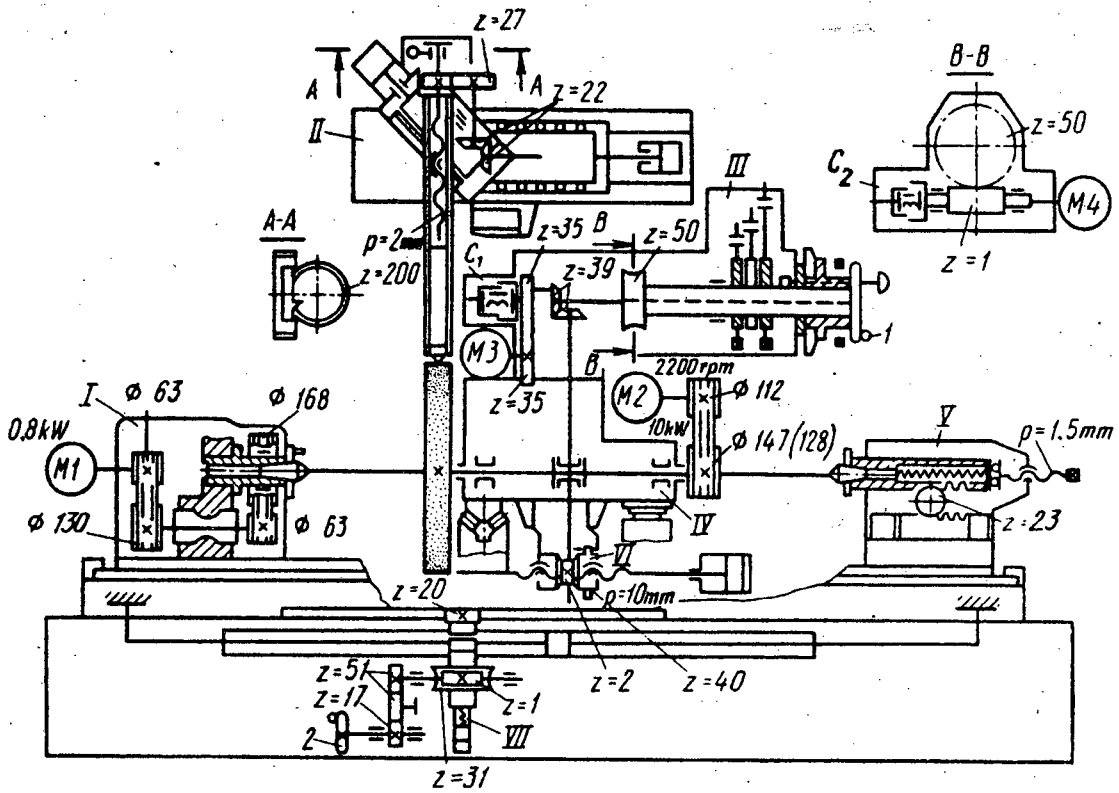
Kinematic diagram of cylindrical grinding machine, model 3M51: I — workhead; II — wheel dresser; III — feed mechanism; IV — wheelhead; V — tailstock; VI — rapid-approach mechanism; VII — hand-operated table-traverse mechanism
